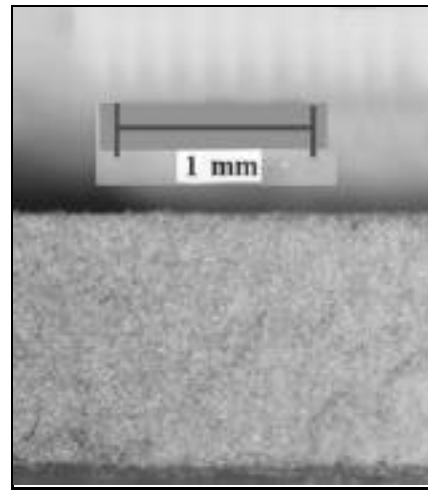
Photograph of the fracture surface of a green stainless steel sample, 0.052" thick, 0.001" layers.
